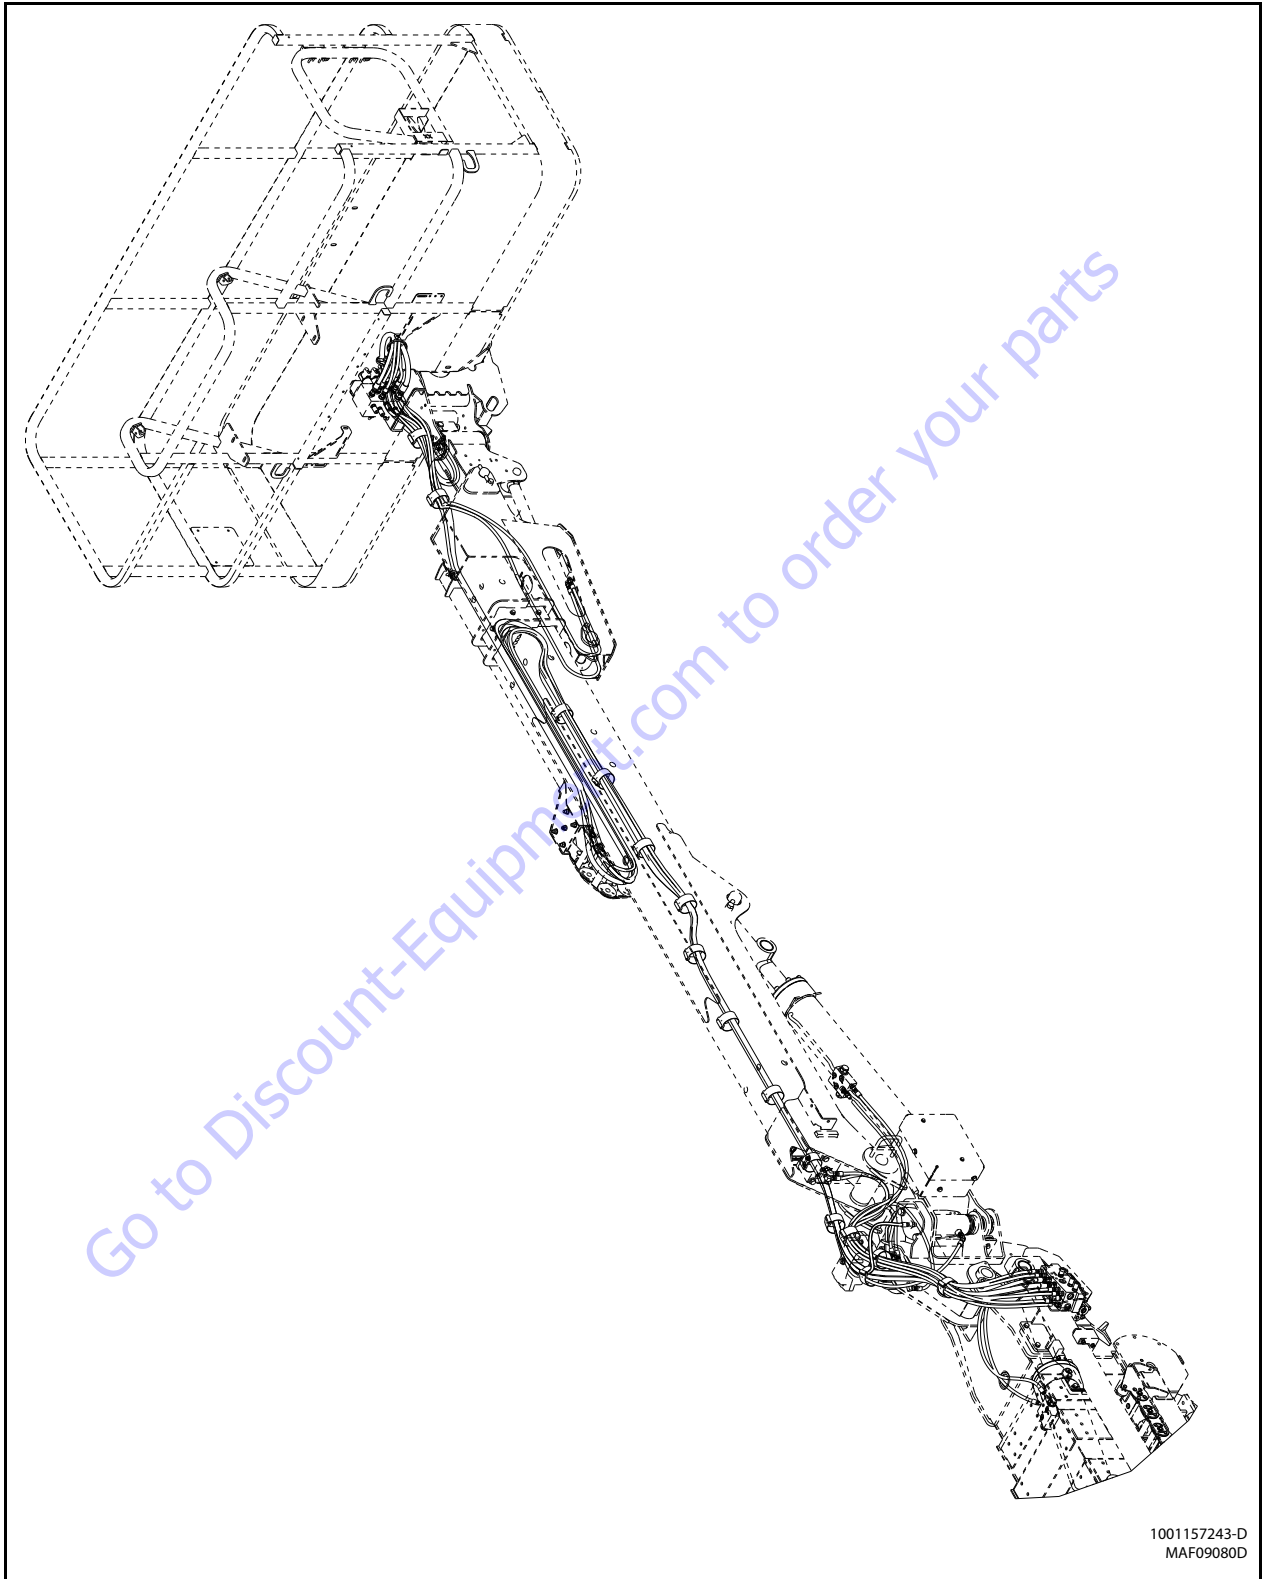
Jib Hydraulics - Sheet 1 of 7
